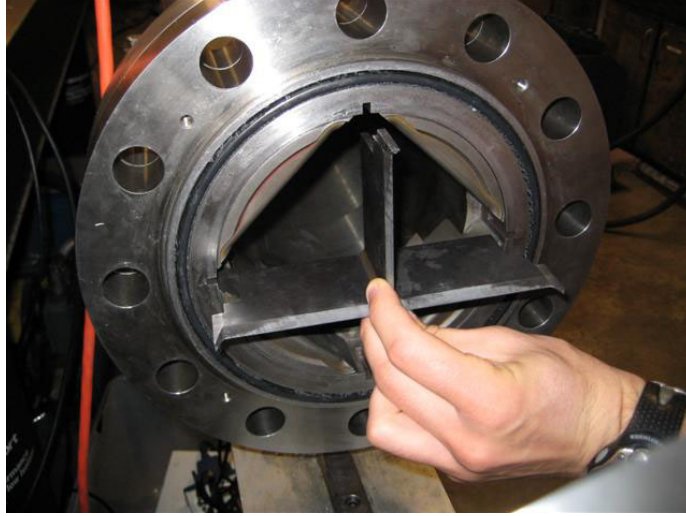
Knife cross diaphragm cutter mechanism being installed into the HET. Note the modified diaphragm flange with milled grooves to provide a locational fit for the knife cross.
